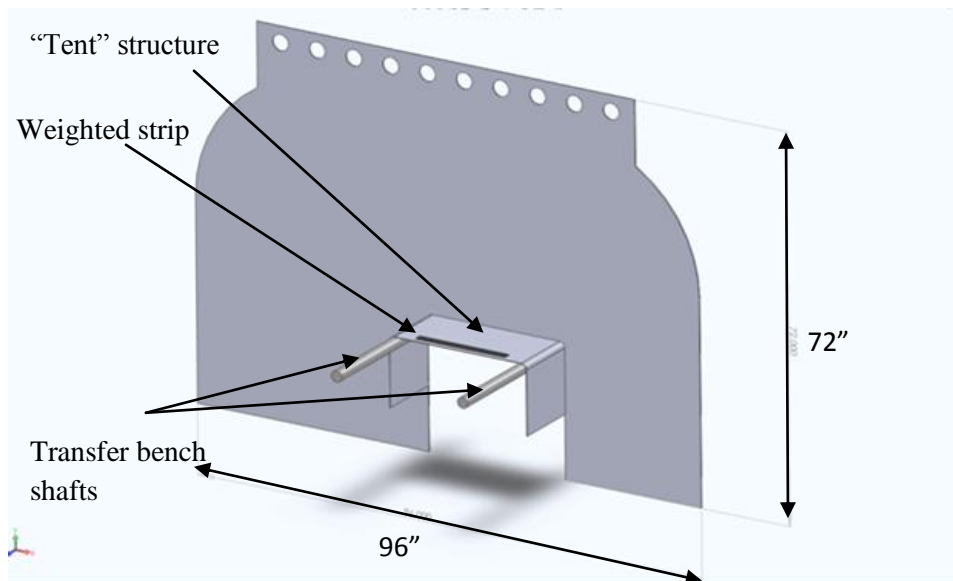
CAD drawing for the Alpha Design ‘The Tent’
